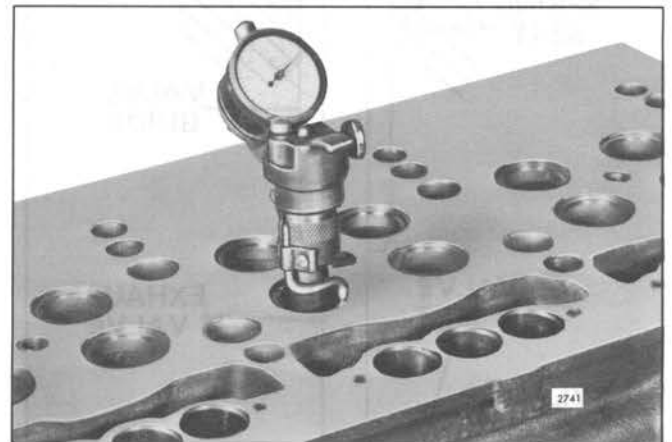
Checking Relative Concentricity of Valve Seat Insert with Relation to Valve Guide
